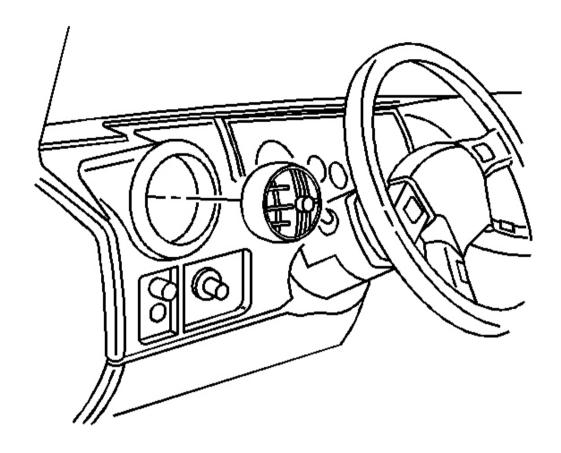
Air Deflector & Trim Panel (Left) Courtesy of GENERAL MOTORS CORP.
